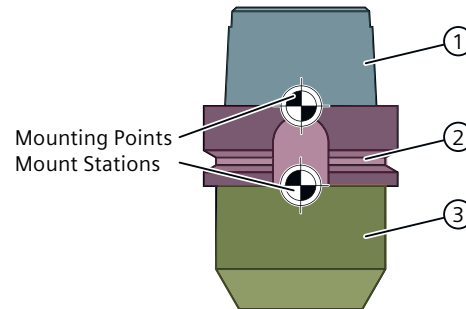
Example adapter milling tool/drill bit, composed of three partial geometries
